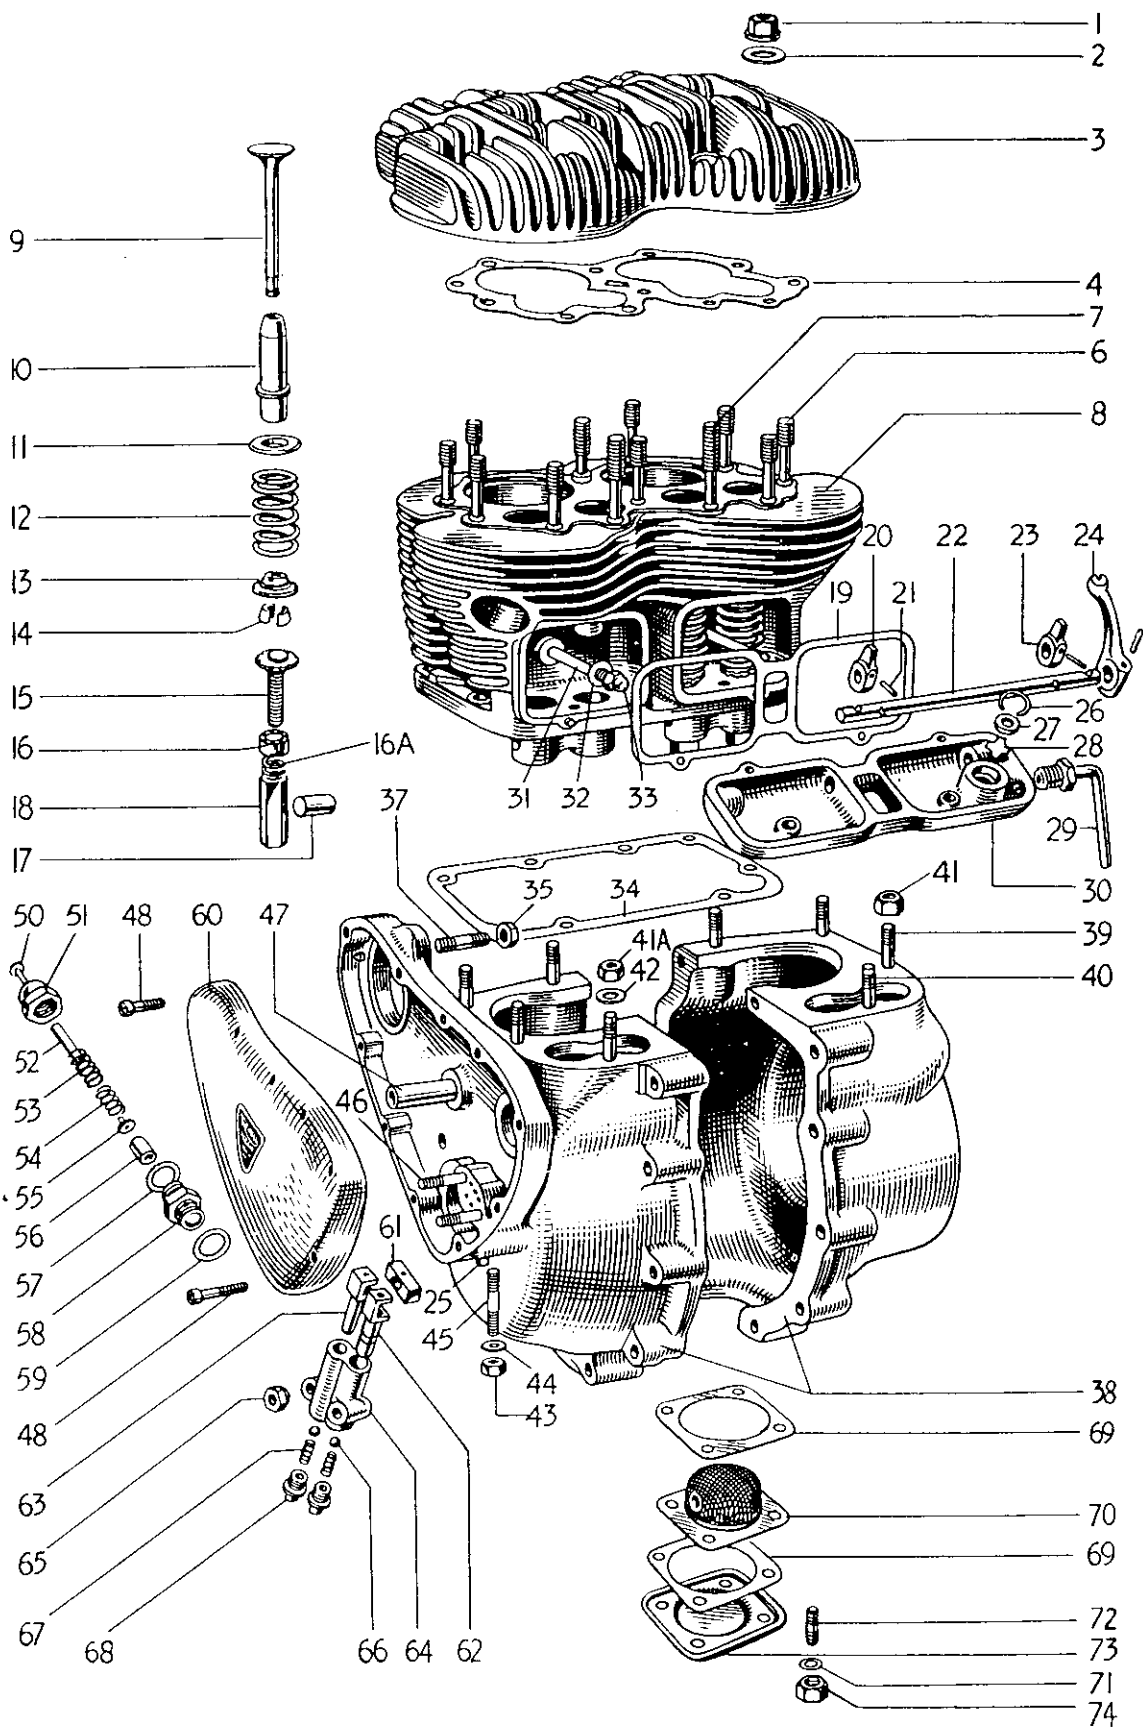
CRANKCASE, CYLINDER BLOCK AND HEAD.
